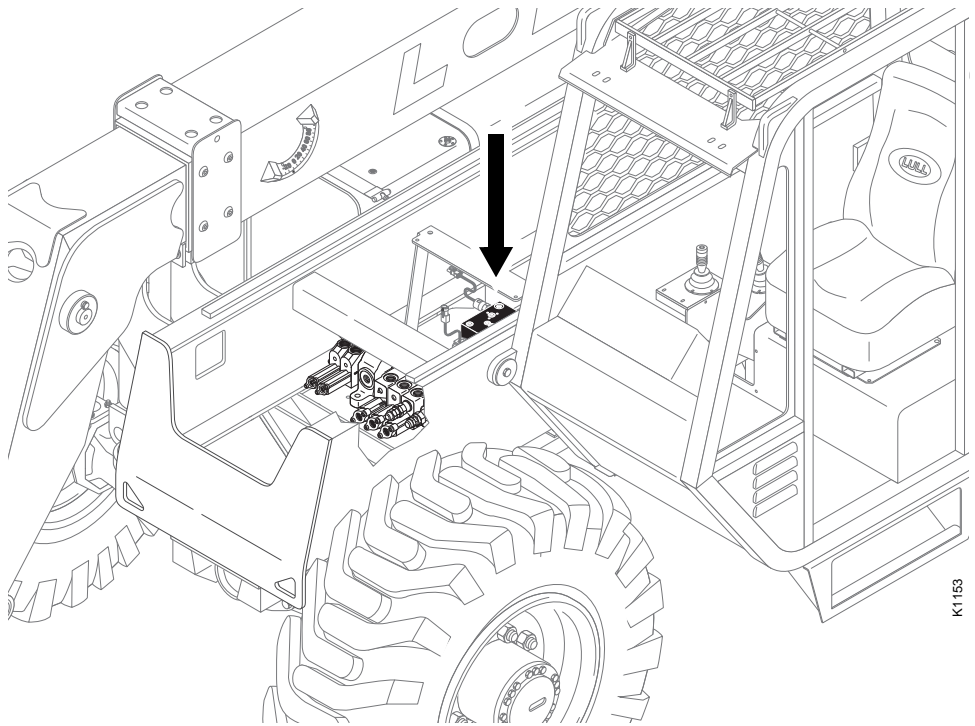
Rear Axle Stabilizer Control Valve Location
